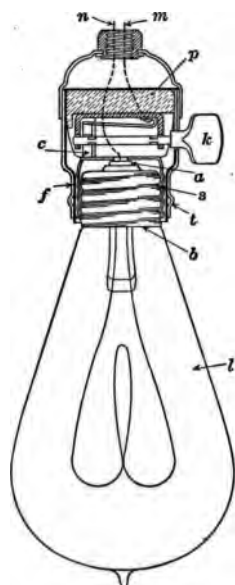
Sectional View of Key Socket, showing its Construction and Connection with the Lamp.
